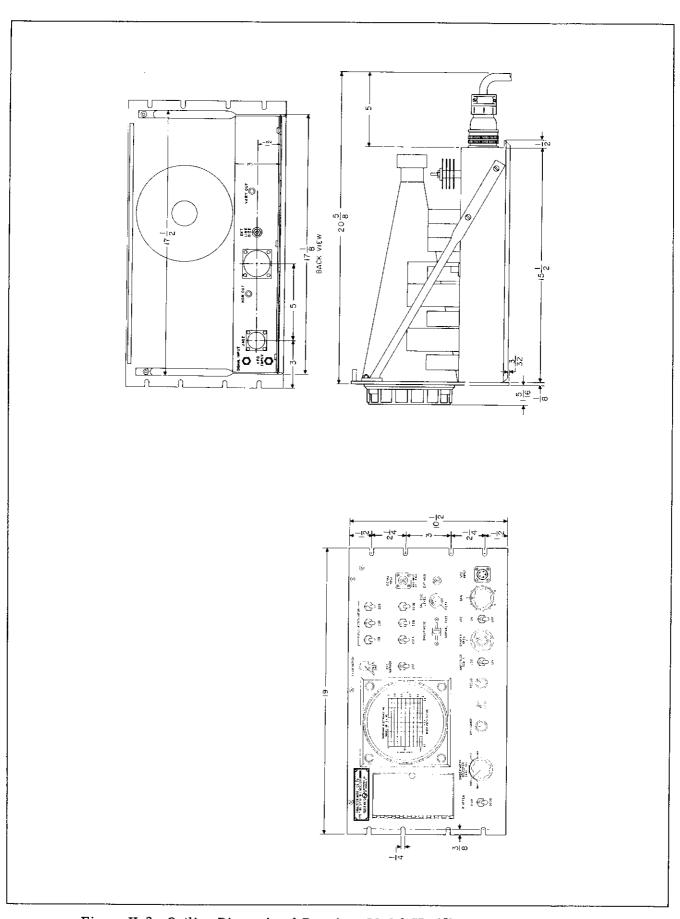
Outline Dimensional Drawing, Model SB-12b, Rack Mount Style.
